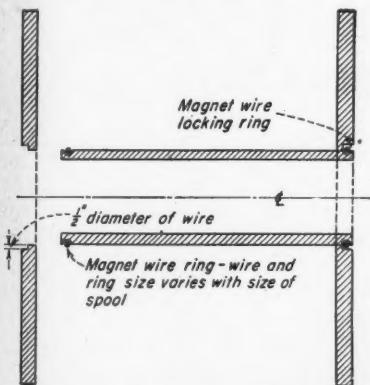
Cross-section of fibre spool for winding magnet coils. Note wire ring lock-tight feature of spool end-washers.
